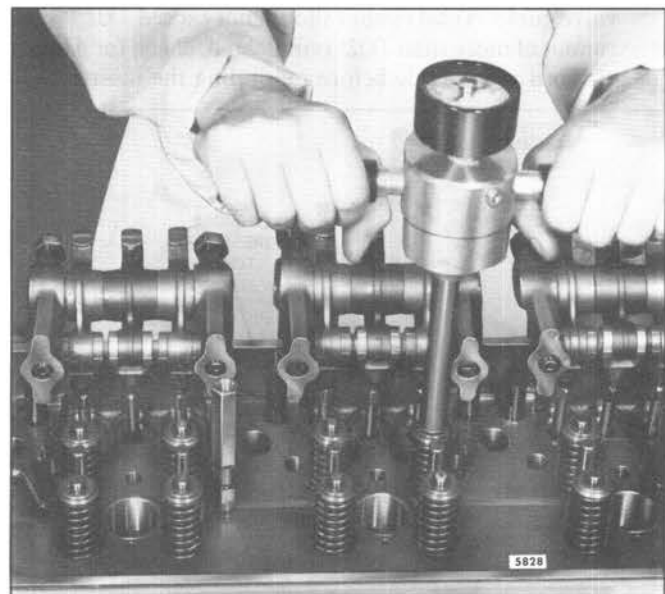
Checking Pressure Required to Open the Exhaust Valve in Cylinder Head with Tool J 25076-01
